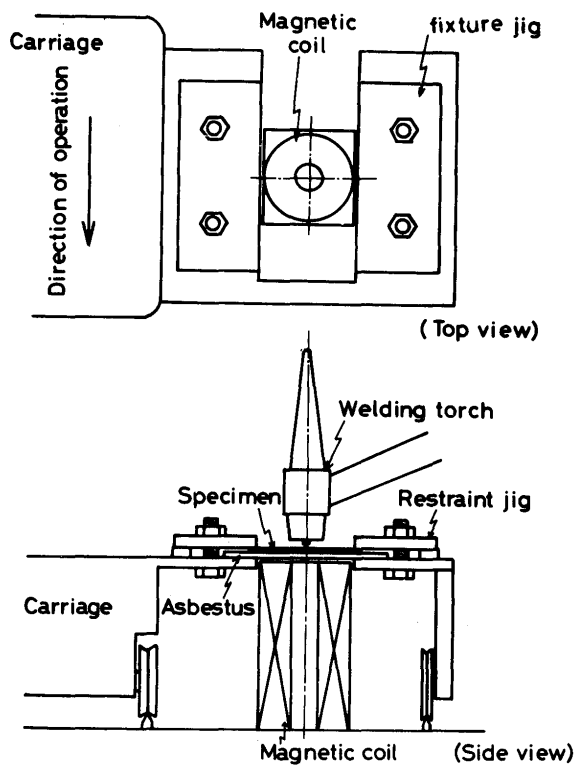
Arrangement of magnetic coil, welding torch and specimen
